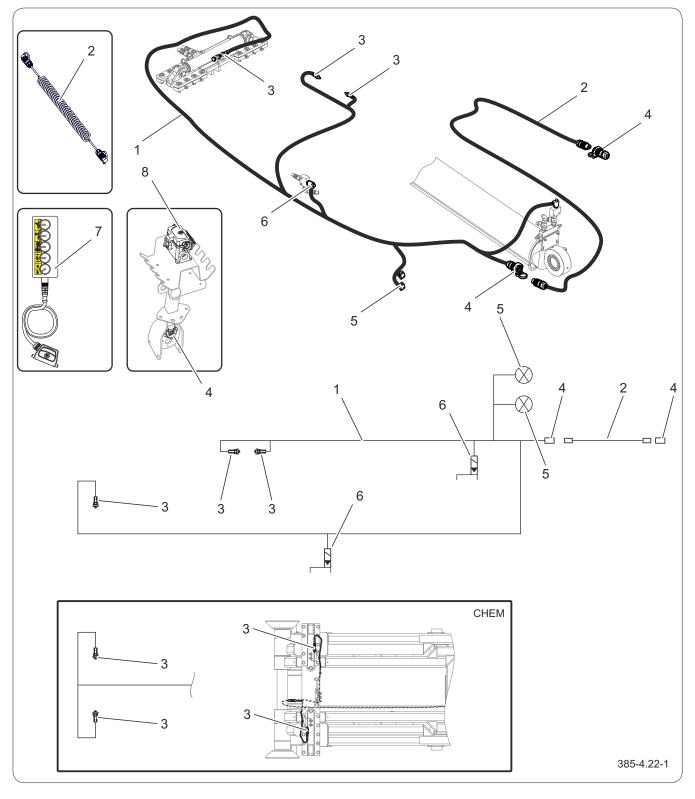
Construction and diagram of the electrical installation of the hydraulic system
